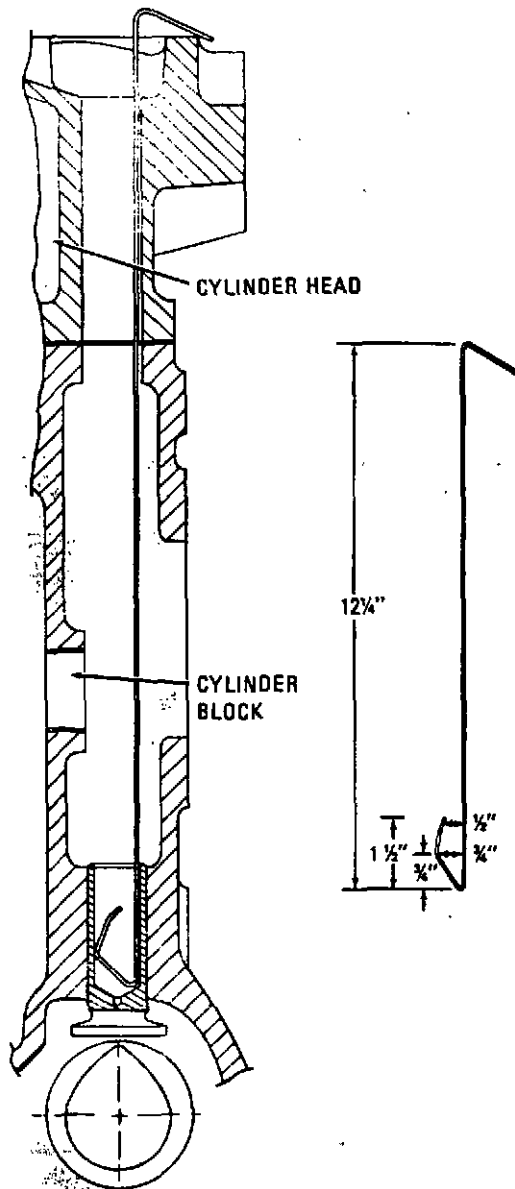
Valve Tappet Positioned for Camshaft Removal
